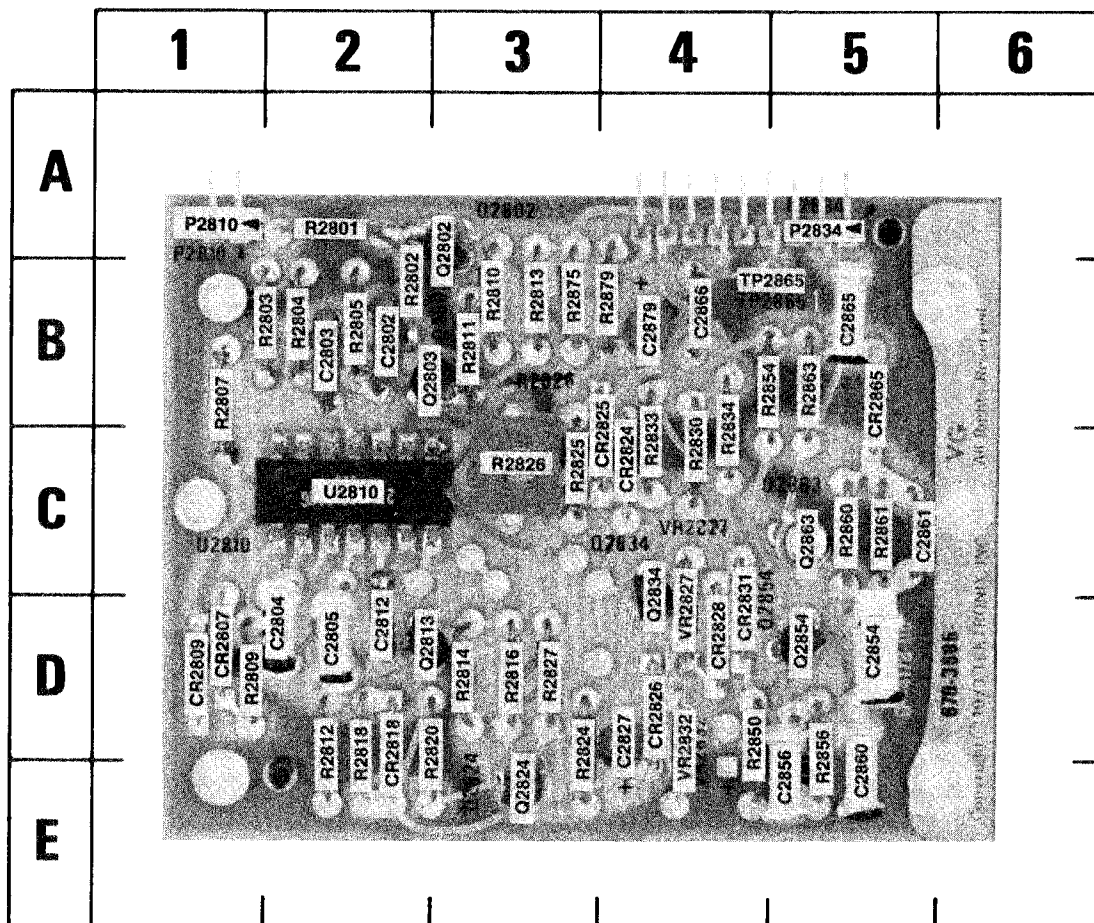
A12 TV Sync Separator & Inverter Ampl board component locations.
